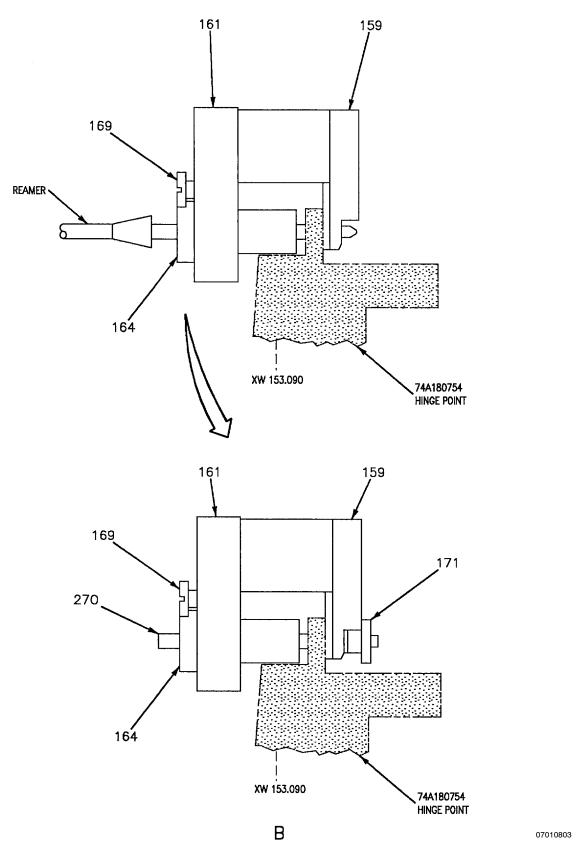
Bushing Replacement At XW153.090 Outboard Hinge Point (Sheet 3)
